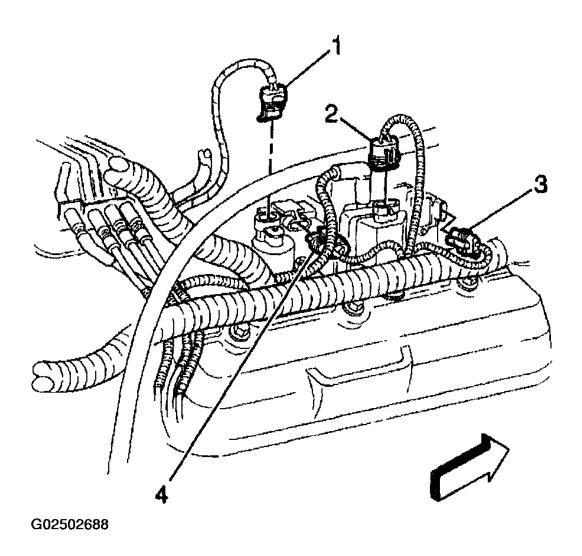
Locating Knock Sensor, Distributor & Engine Oil Pressure Sensor Connectors Courtesy of GENERAL MOTORS CORP.
